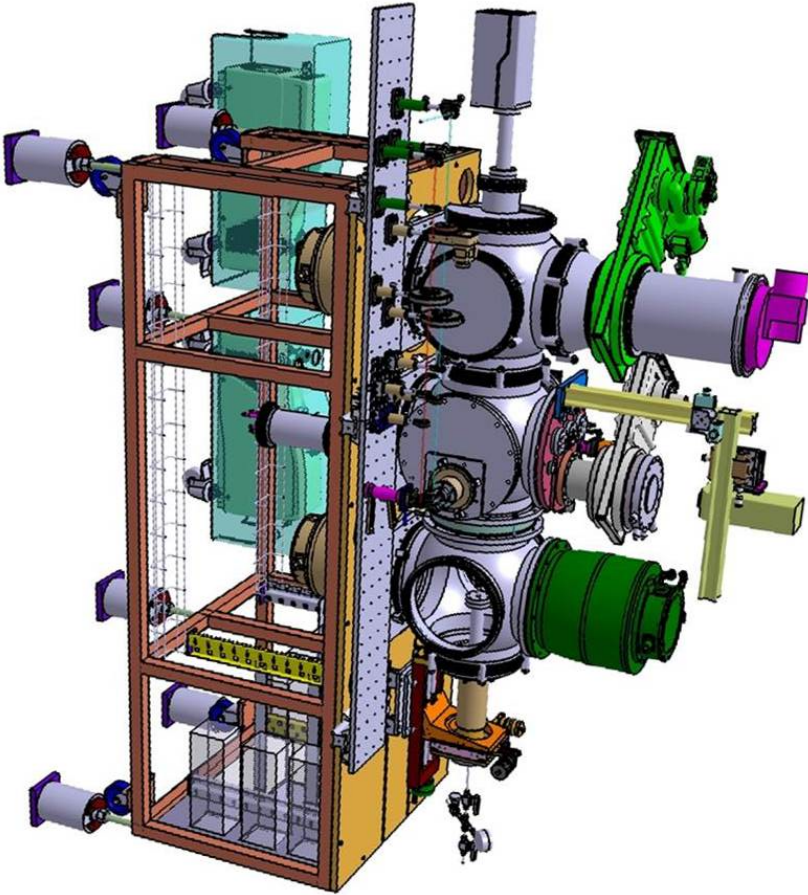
Front view of the measuring apparatus in Sacloy I
